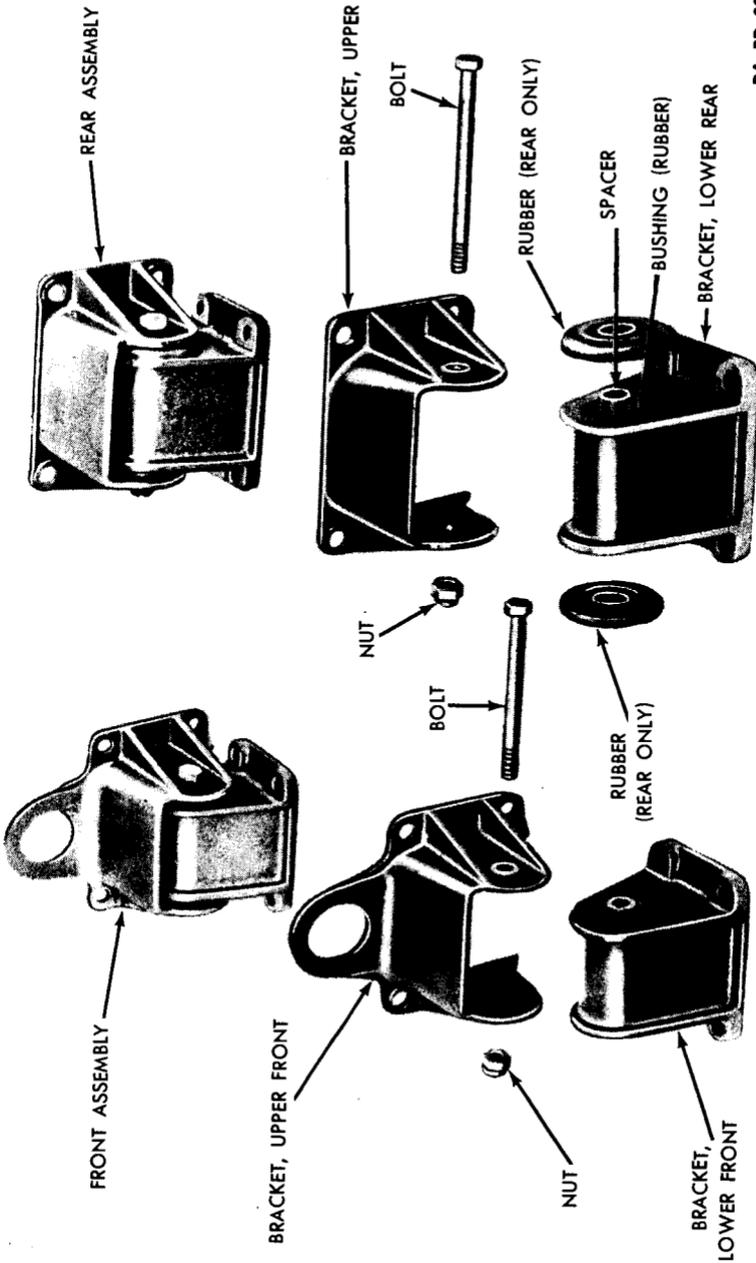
Engine Supports, Disassembled (Used on GAA and GAN Engines)
